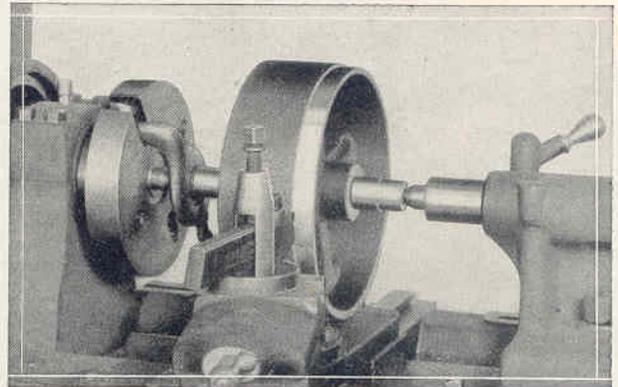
Machining a Cast Iron Pulley Mounted on a Mandrel.
